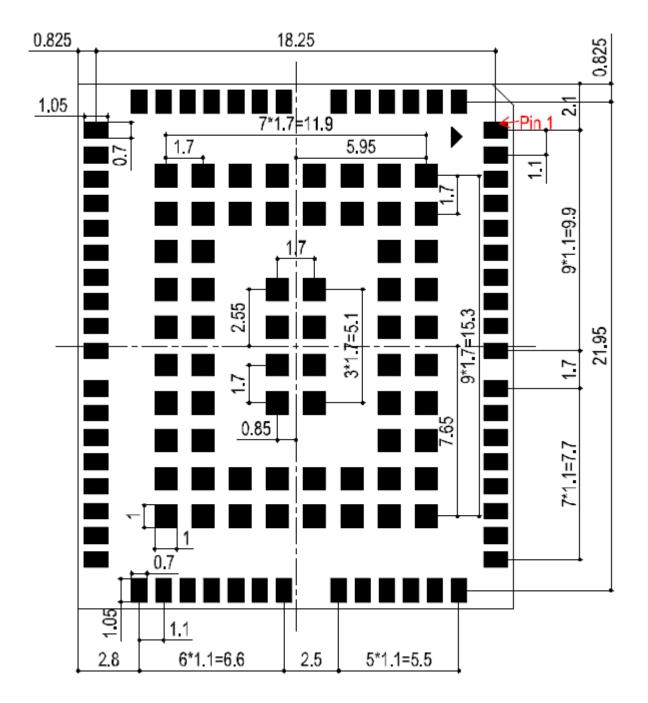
EG915Q Series Bottom Dimension (Bottom View, Unit: mm)
